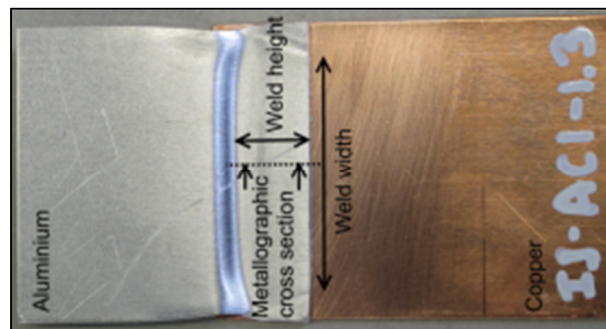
Electromagnetic pulse sheet weld of copper to aluminium EN-AW 1050 + Cu-ETP (Source: BWI)
